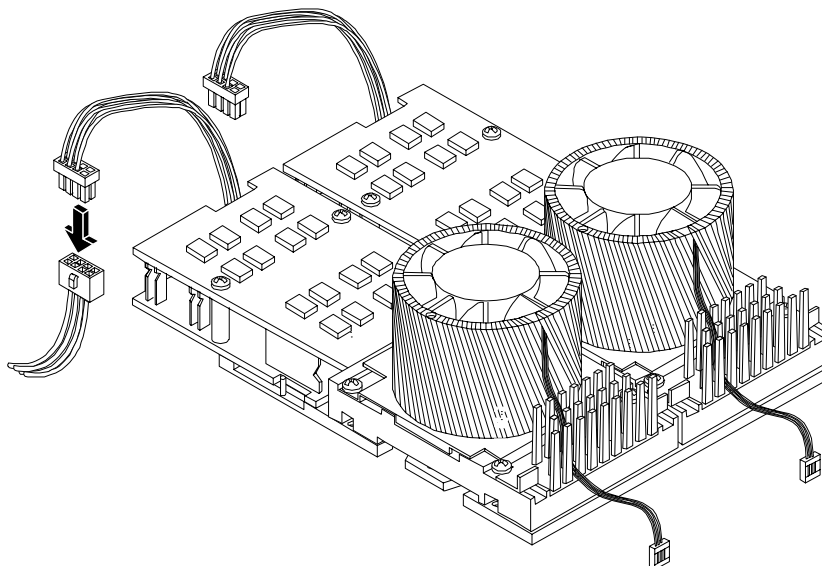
Routing Turbofan Power Cables through Heatsink Posts
